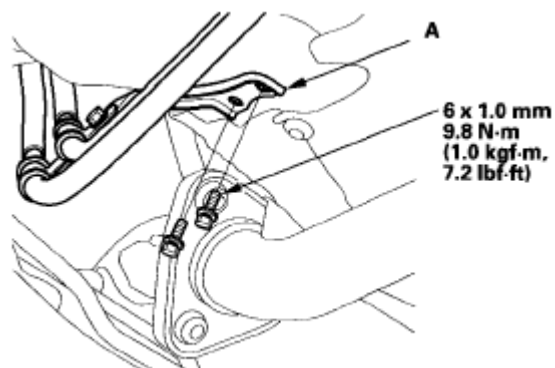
Identifying Shift Cable Bracket (With Torque Specifications)
